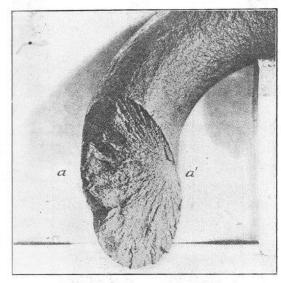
Typical Fracture of Coil of a Heavy Helical Spring.
